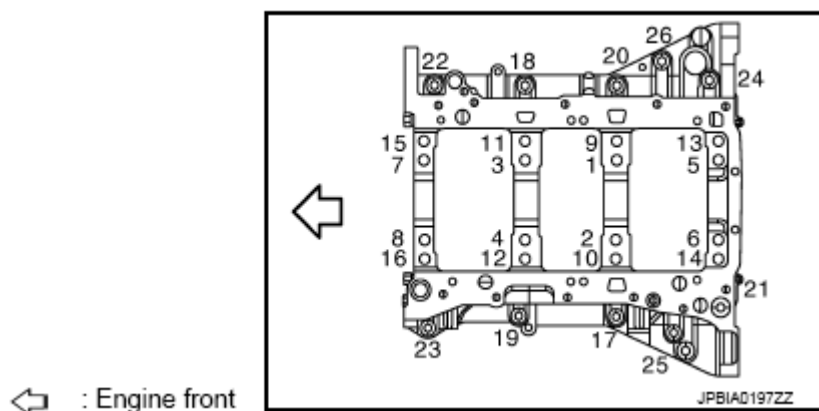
Locating Lower Cylinder Block Bolts With Tightening Sequence
